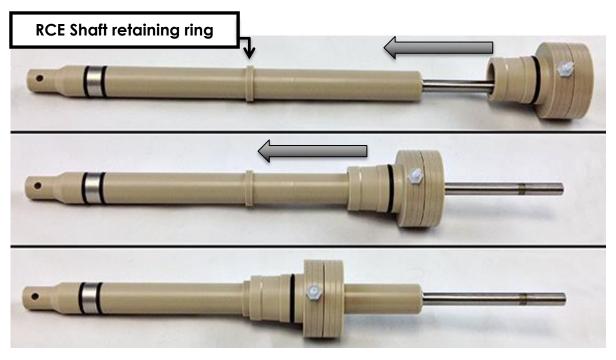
Installation of the Gas-Purged Bearing Assembly onto the Single Cylinder RCE Shaft.
